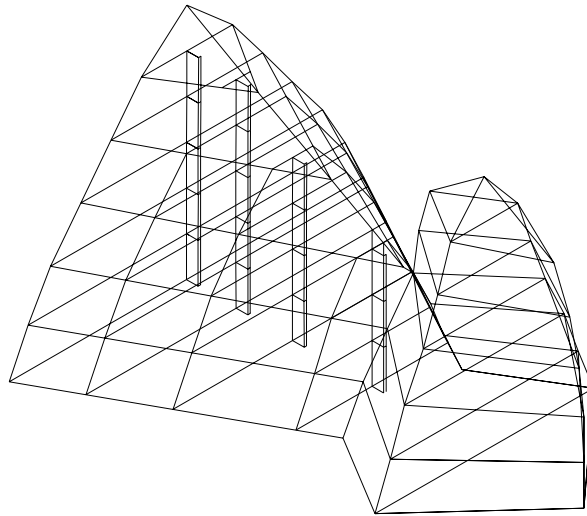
AutoCAD drawing of 500 dwt Coaster Bow
